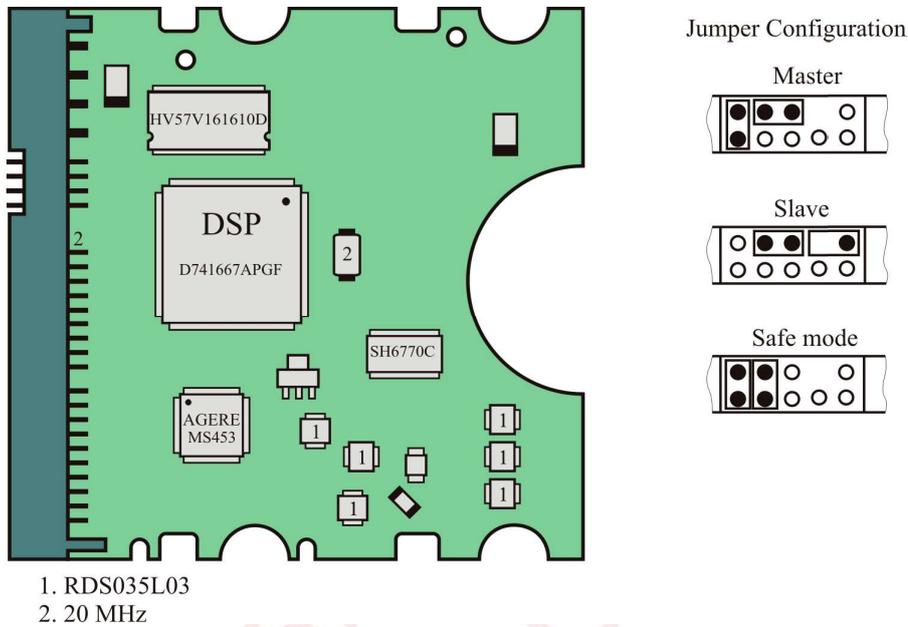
External view of the controller board in MAXTOR RIGEL drive family.
